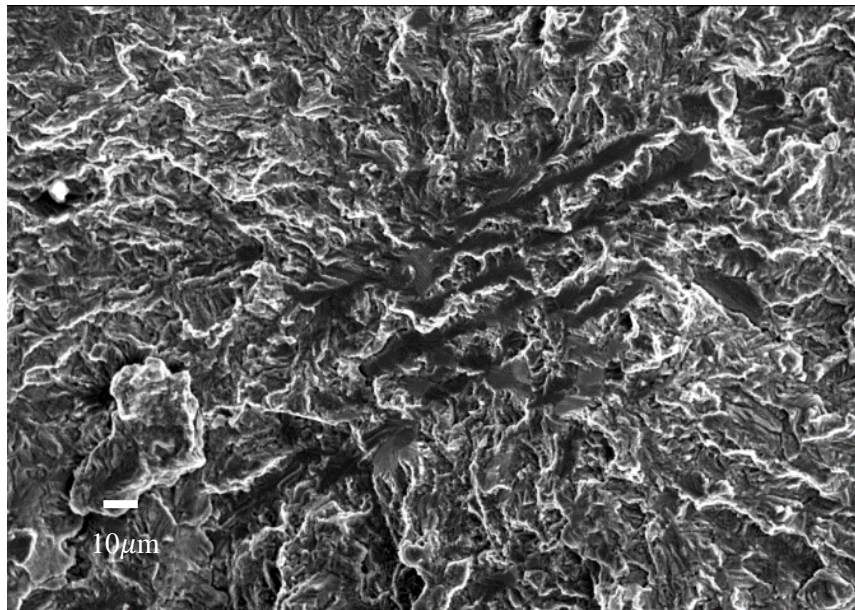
Fracture surface of specimen Q1-6.
